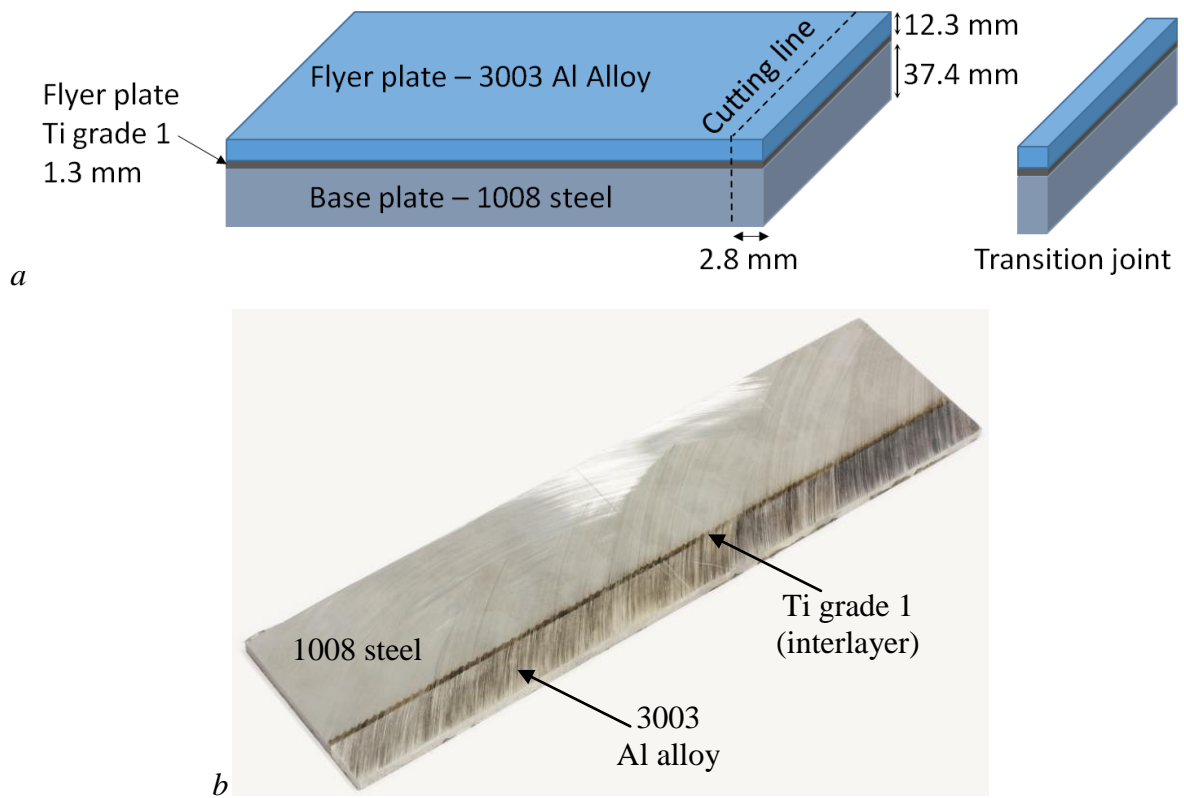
Sketch of the explosion-welded composite plate and of a transition joint cut from the same plate (a) and picture of one as-cut transition joint (b).
